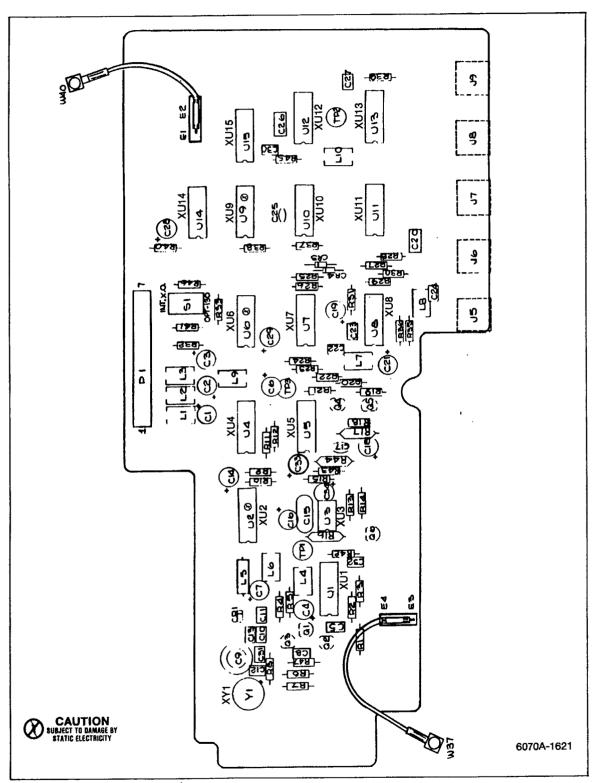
A3A2 10 MHz Reference PCB Assembly
